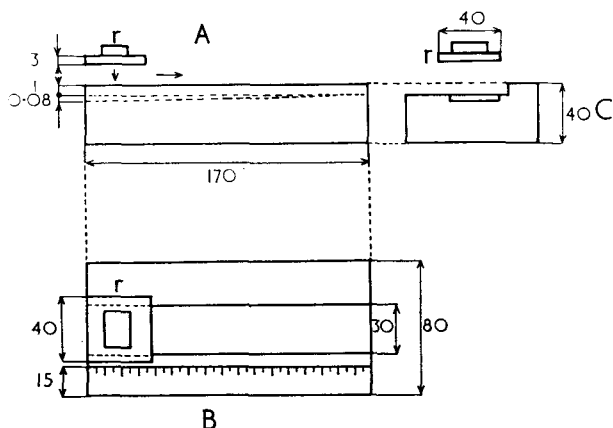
Schematic sketch of the grindometer. A = front view; B = top view; C = side view; r = rubbing spatula. All dimensions are in millimetres.
